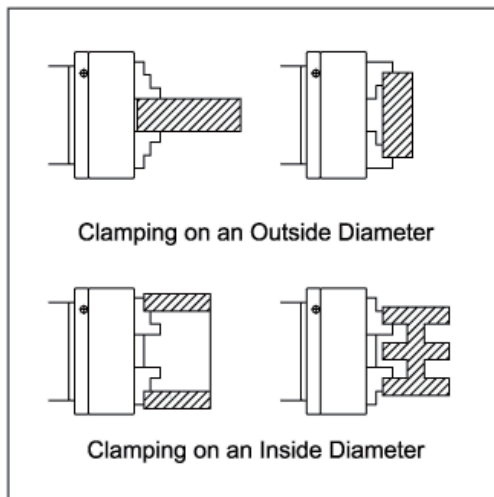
Examples of workpiece mounted in the 3-jaw chuck.
